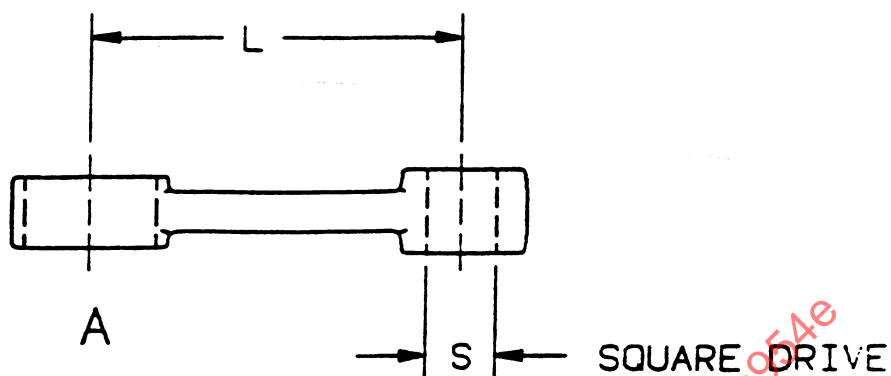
Type I, Class 2 Universal Socket Dimensions (Dimensions in Inches)
